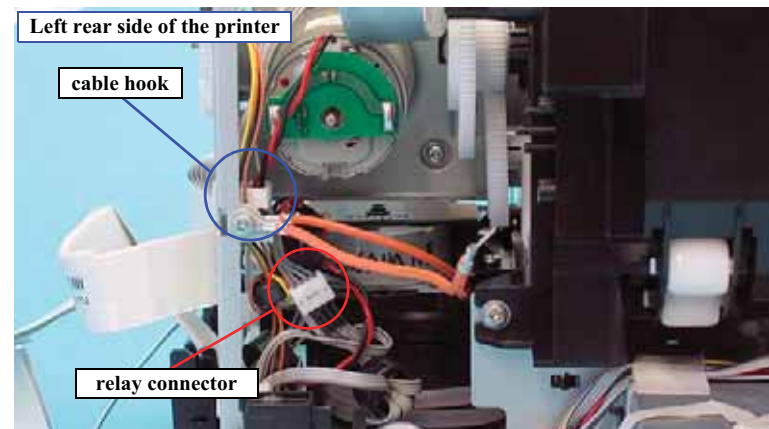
Releasing the cables of the MOTOR ASSY., ASF
